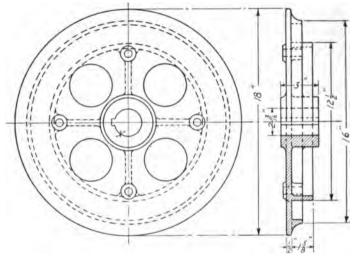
End View and Part Section of Drum Heads for Wire-Rope Elevator
